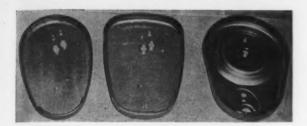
FIG. I—Three different base units welded on the Sciaky MG-5 automatic welder.
